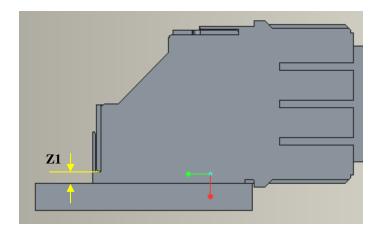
Height from the lowest surface of the stiffener to the PCB surface [Z1]
